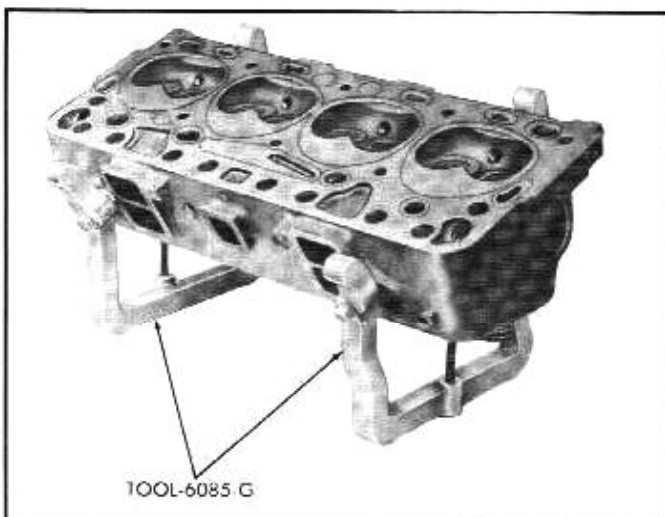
A-32—Cylinder Head Positioned for Carbon Removal
